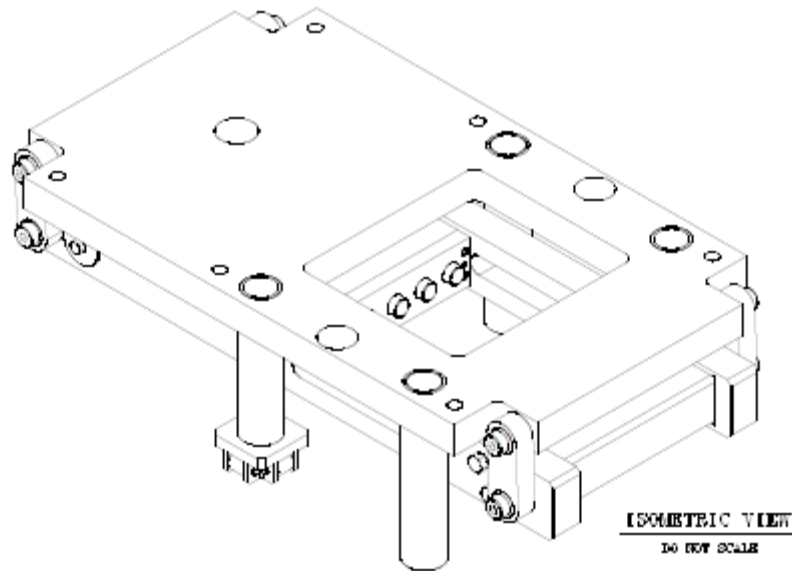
Shield Block Main Assembly. Shown with the cover removed
